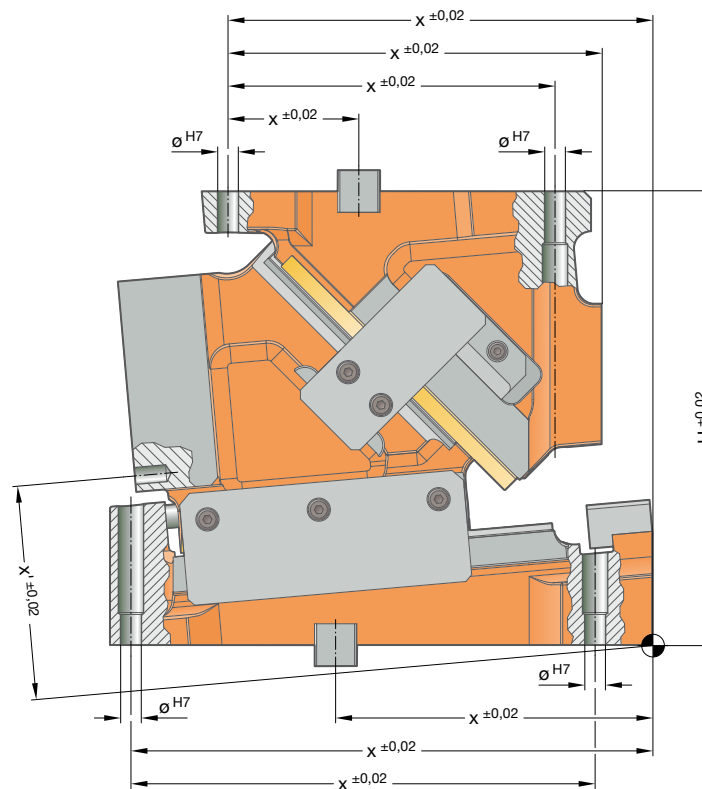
Tolerances of lower cam units with EFP equipment
